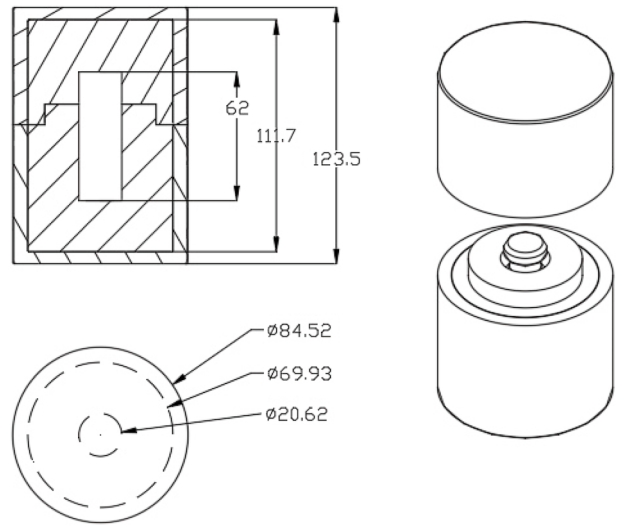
Drawing of ¹³¹I mIBG lead shielding container.
